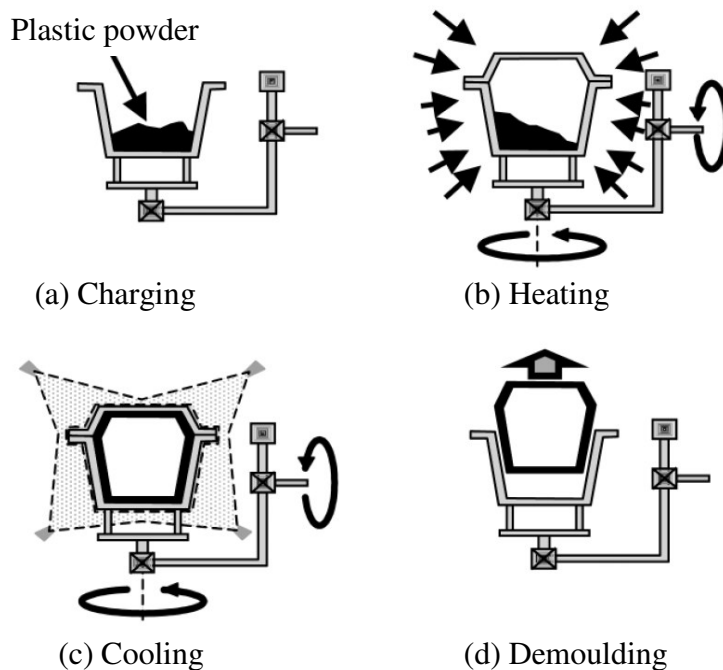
The rotational moulding process (Crawford & Throne, 2002)
